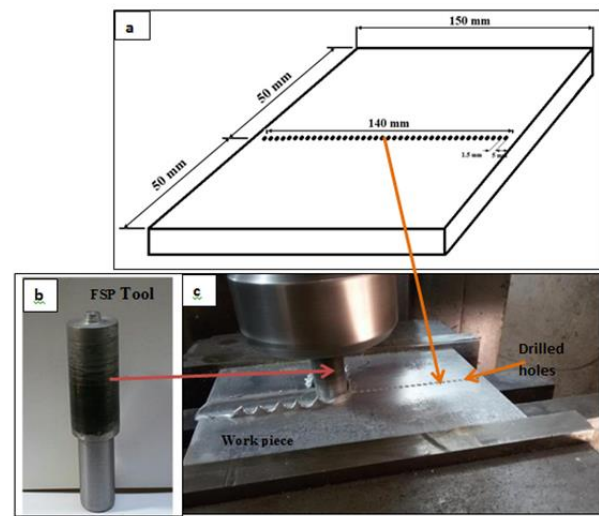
(a) Schematic illustration of the work piece dimensions and drilling holes on the top surface of work pieces, (b) FSP Tool, (c) Shows the friction stir processing along the center line of the drilled holes.
